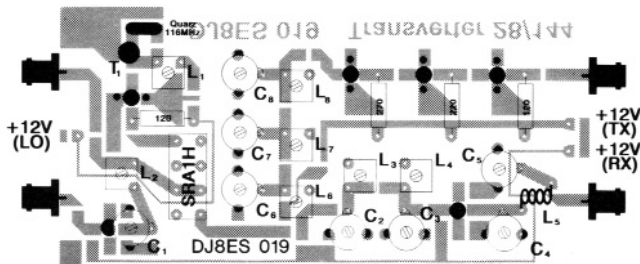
Component layout for the 2m transverter showing the component side of the PCB. The board size is 54 x 108mm
